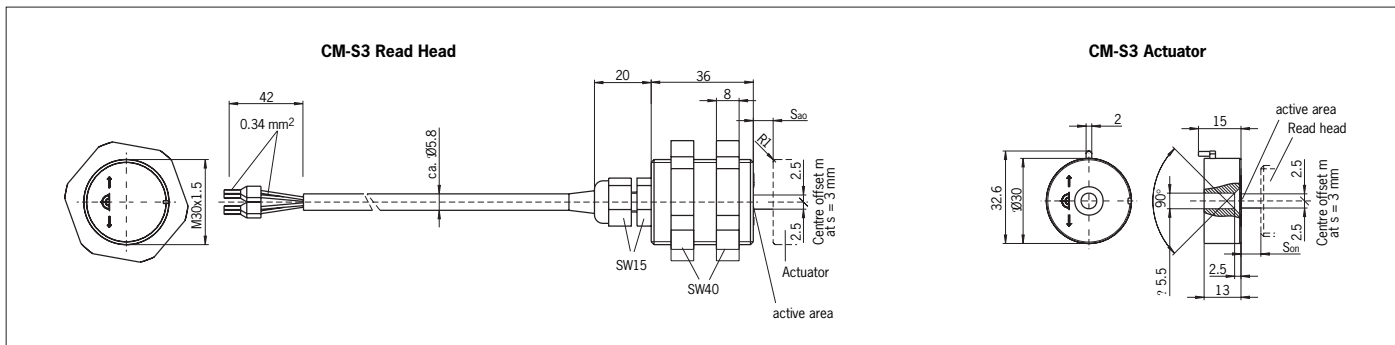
Dimensions for CM-S3 Read Heads and Actuators
